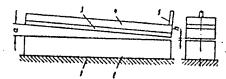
Schematic diagram of explosion-welding of specimens Legend: 1 - rigid base
